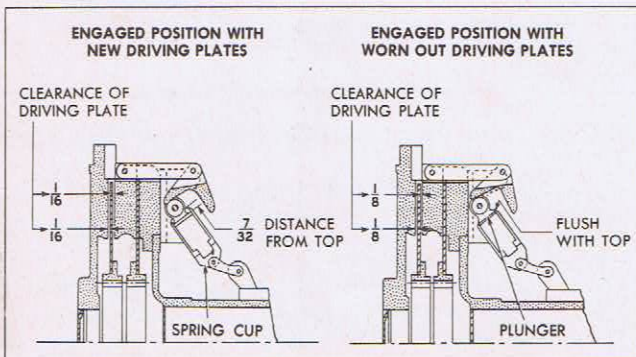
SPRING-LOADED CLUTCH OPERATING MECHANISM.
